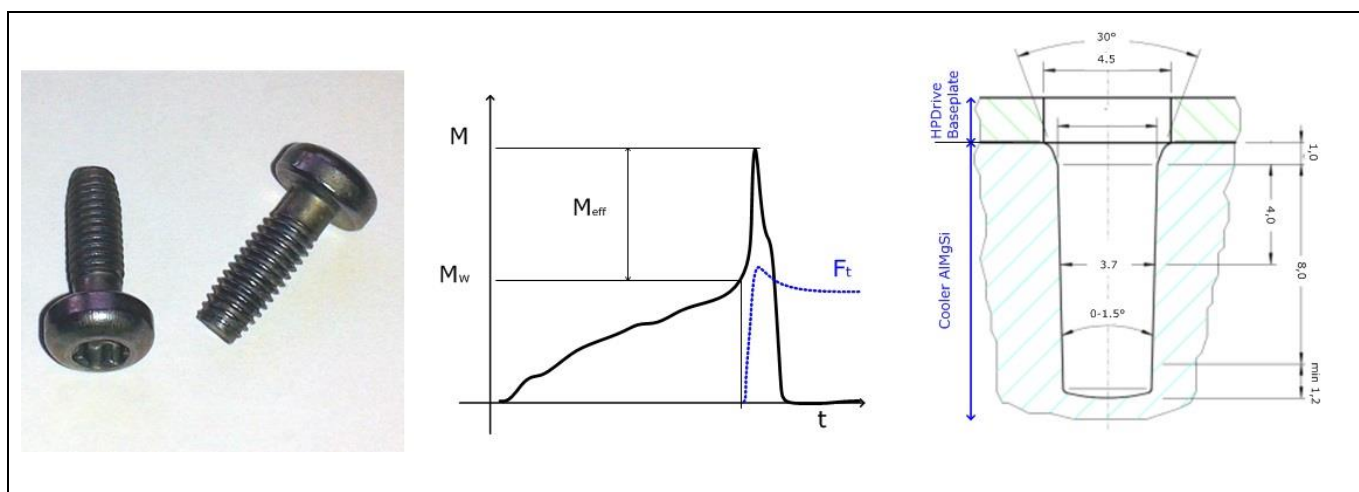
Picture of the self-tapping EJOT ALtracs Plus WN5152 AP 40x12/10. A typical torque and mounting force diagram as well as drawing of the required fixing holes in the cooler. The holes can be also drilled with a standard drill tool (3.7mm 0°).
